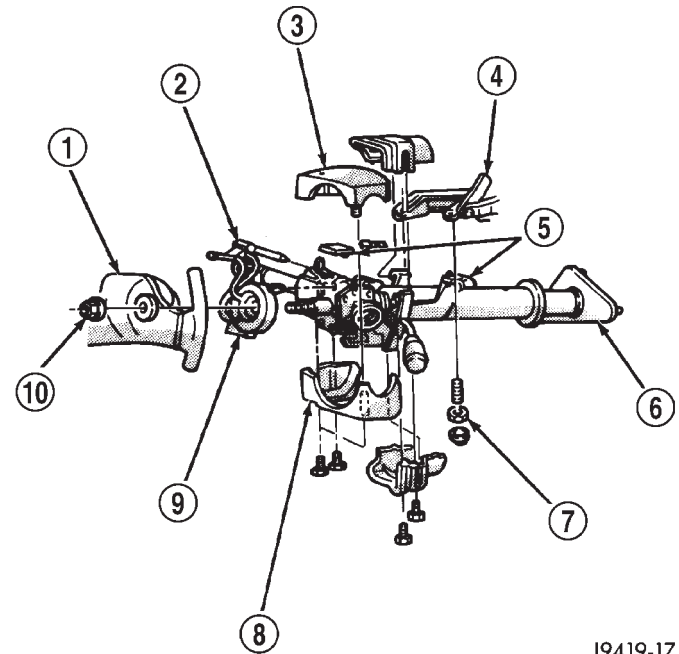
Steering Column Shrouds Remove/Install - Typical
